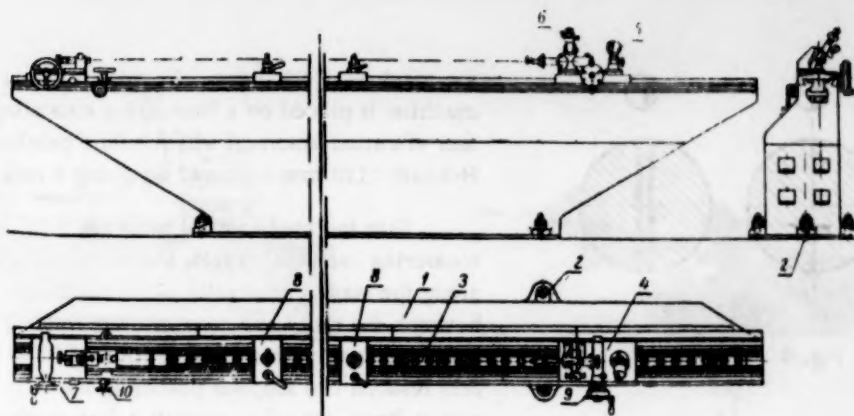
1) Stand; 2) set bolts; 3) decimeter scale; 4) measuring carriage; 5) double-image eyepiece head; 6) measuring microscope with a helical eyepiece micrometer; 7) flywheel drive for the tall spindle head of the measuring carriage; 8) carriers (roller supports); 9) flywheel drive for rough and precise adjustment of the carriage; 10) flywheel drive for lifting the universal object table.
